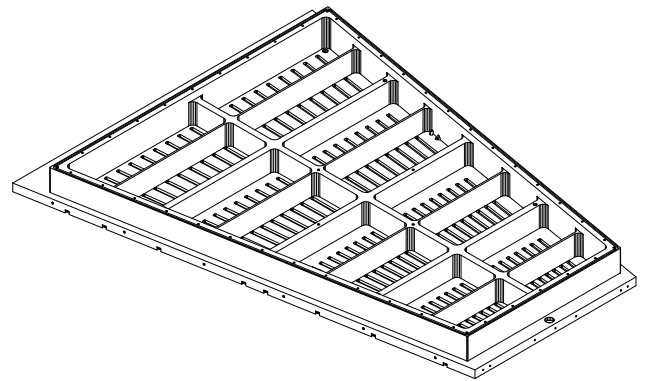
Drawing of the Al-body of an outer readout chamber. Shown is the FEC side with the cut-outs for the flexible cables.
